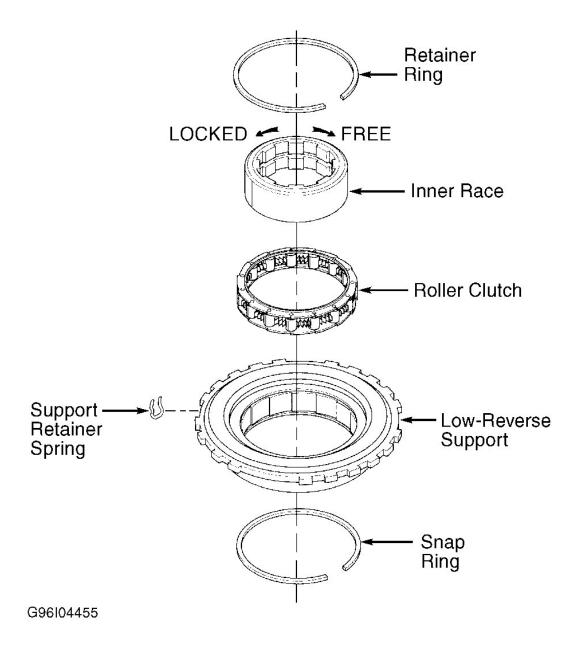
Exploded View Of Low-Reverse Clutch Assembly Courtesy of GENERAL MOTORS CORP.
